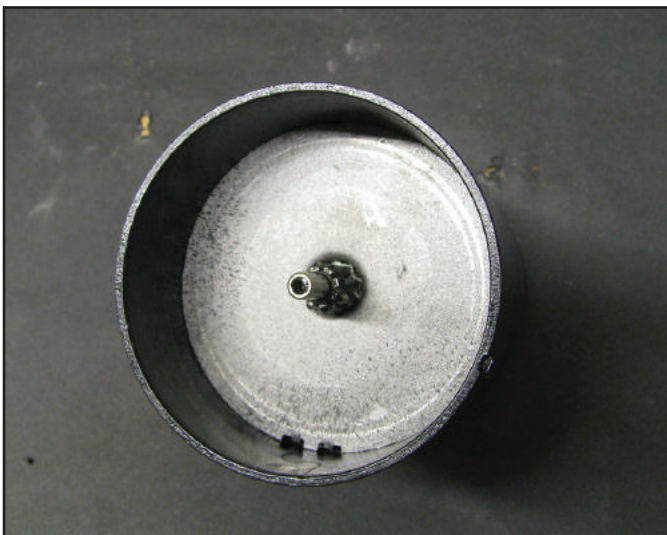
The planet gear cover must be properly seated in place prior to mating the field case assembly to the DE assembly.
